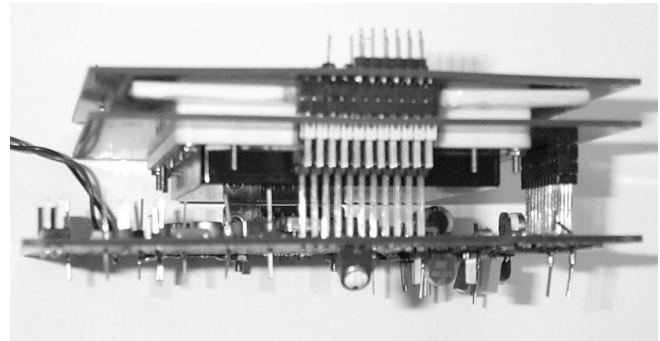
Side view of assembled sensor electronics. Row amplifiers are on top board, sensor film clamped between it and the multiplexer board with the opaque lid, and the CPU is at bottom.
